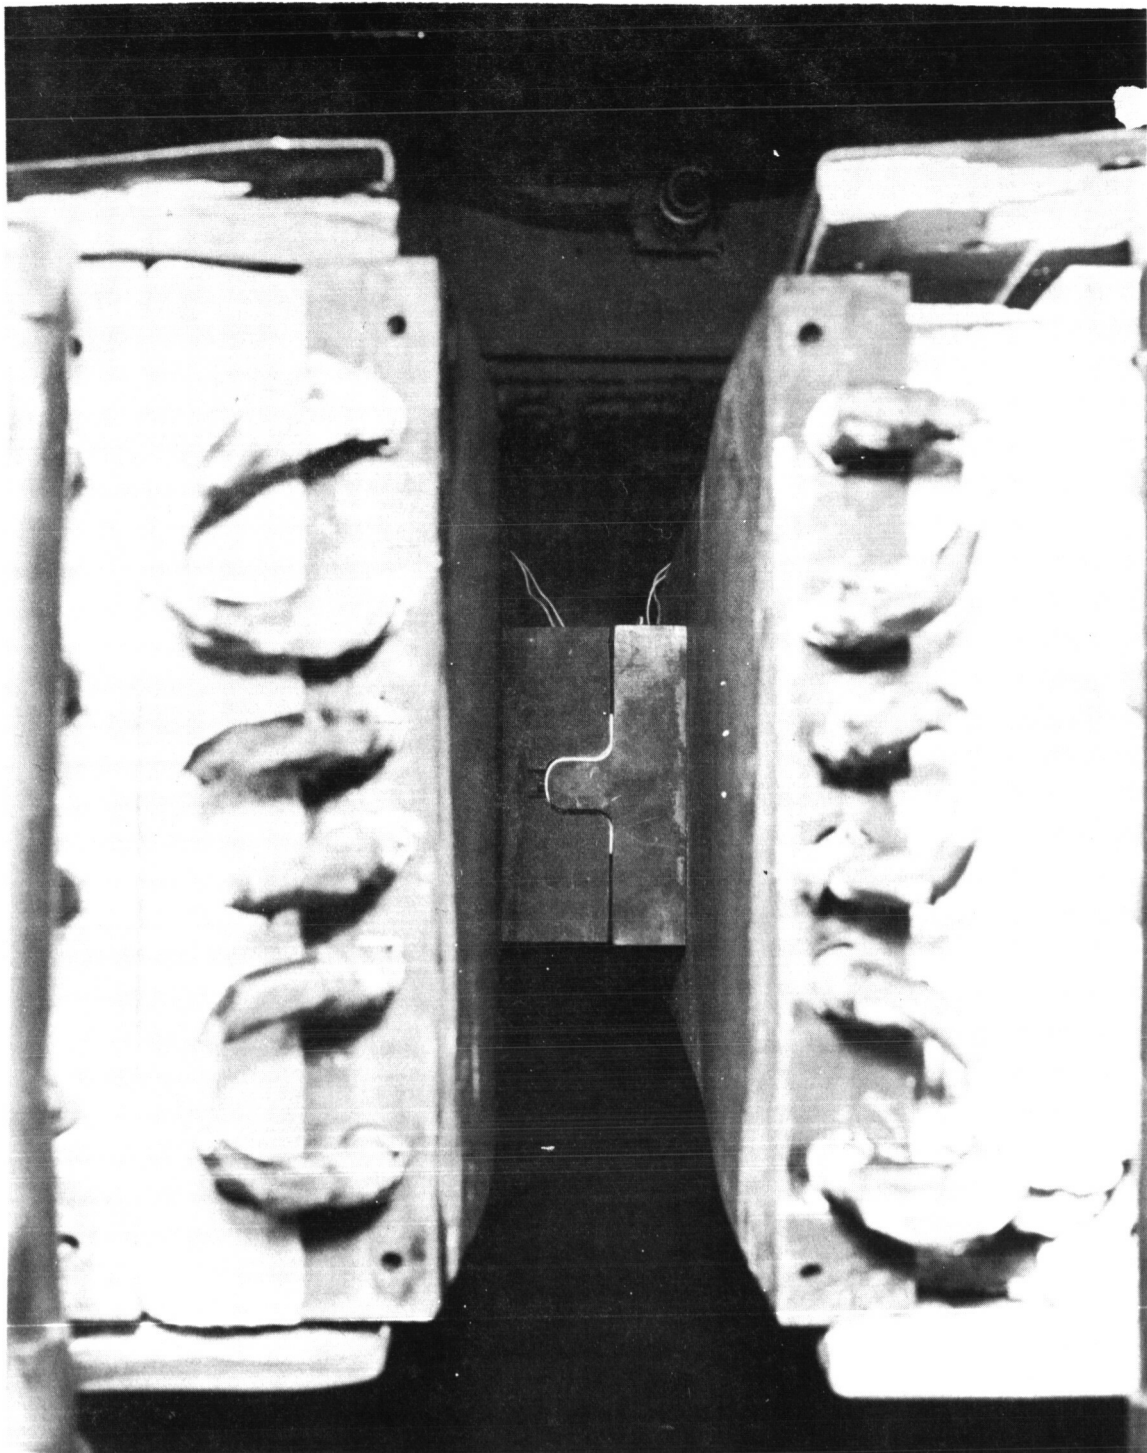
FORMING OF THE "HAT" SECTION - END VIEW
